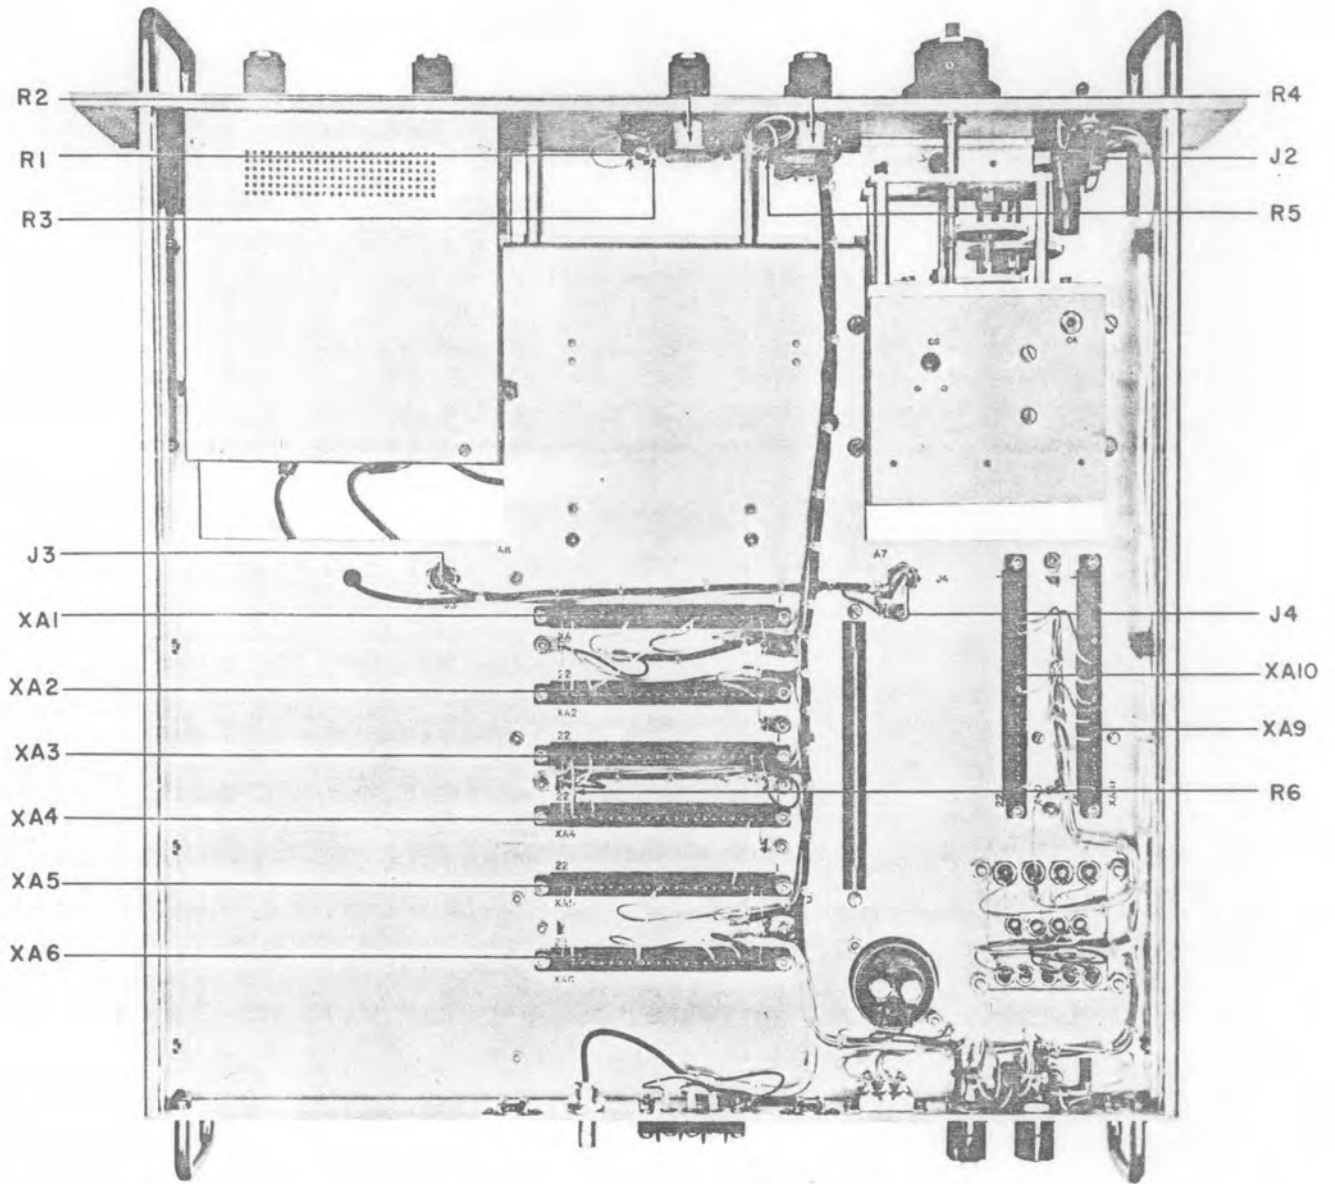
Type DMS-109 Tunable Demodulator, Bottom View, Component Locations
